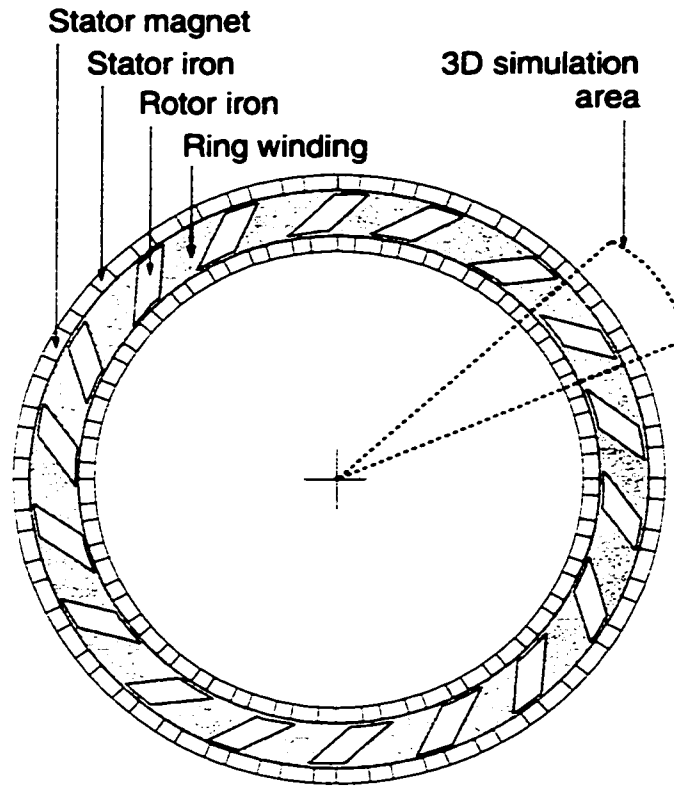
Cross section of the passive rotor machine with *slanted rotor design* showing the three-dimensional simulation area
